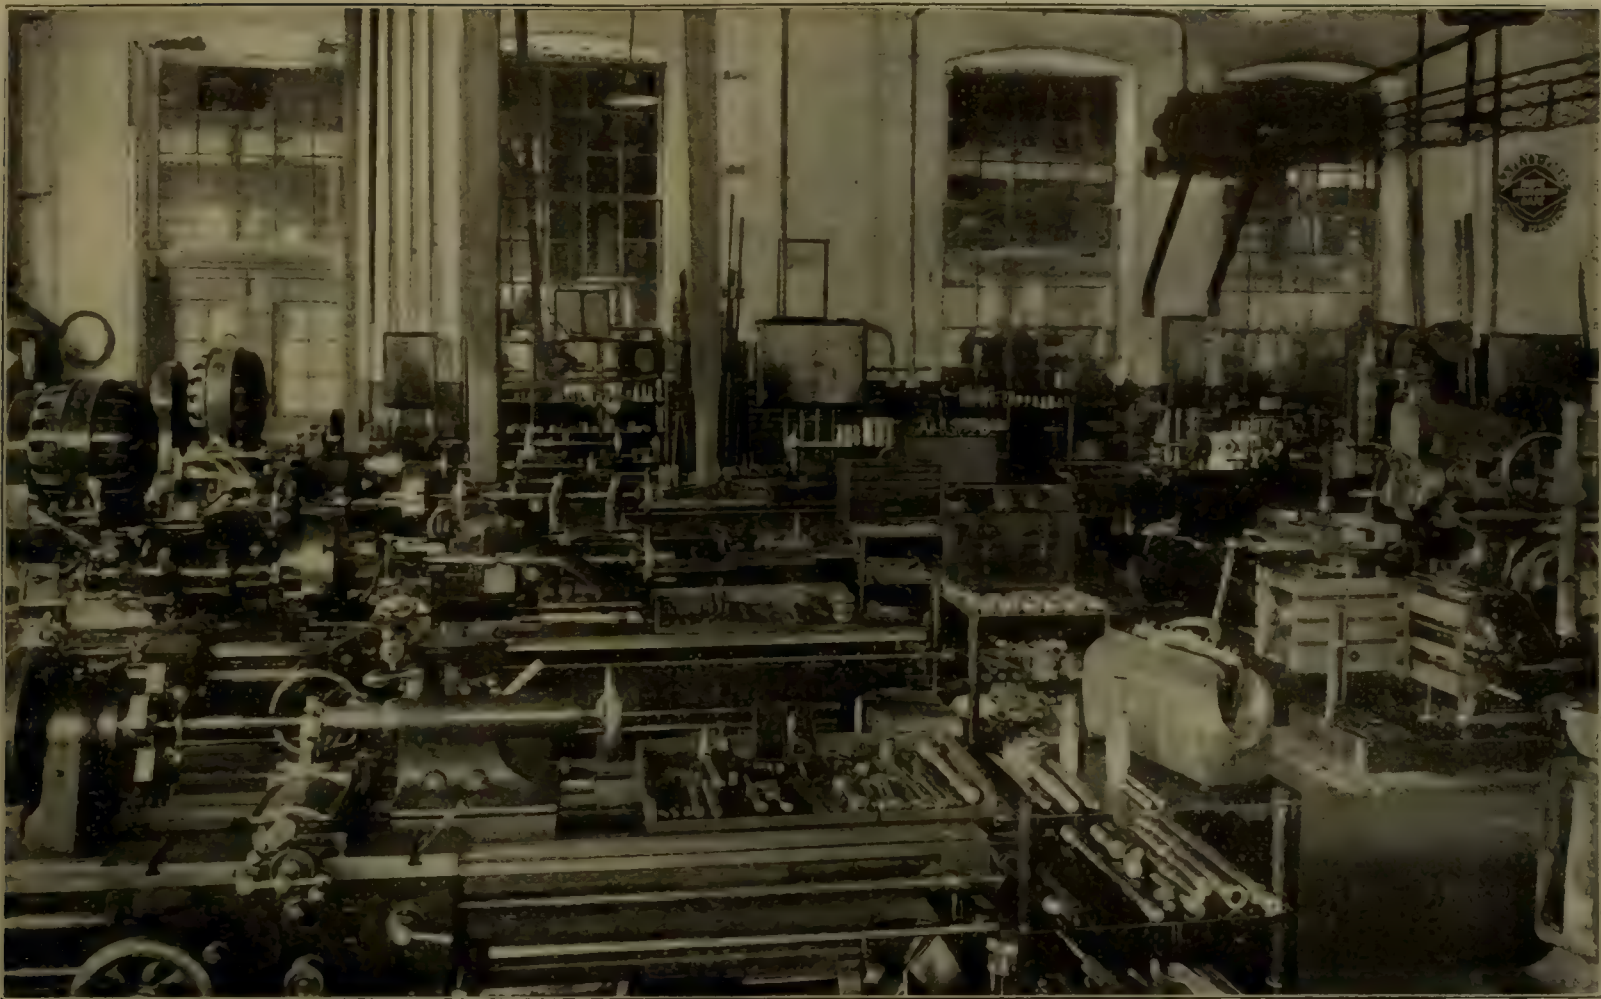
Tools and Jigs for Manufacturing Drill Sleeves.
